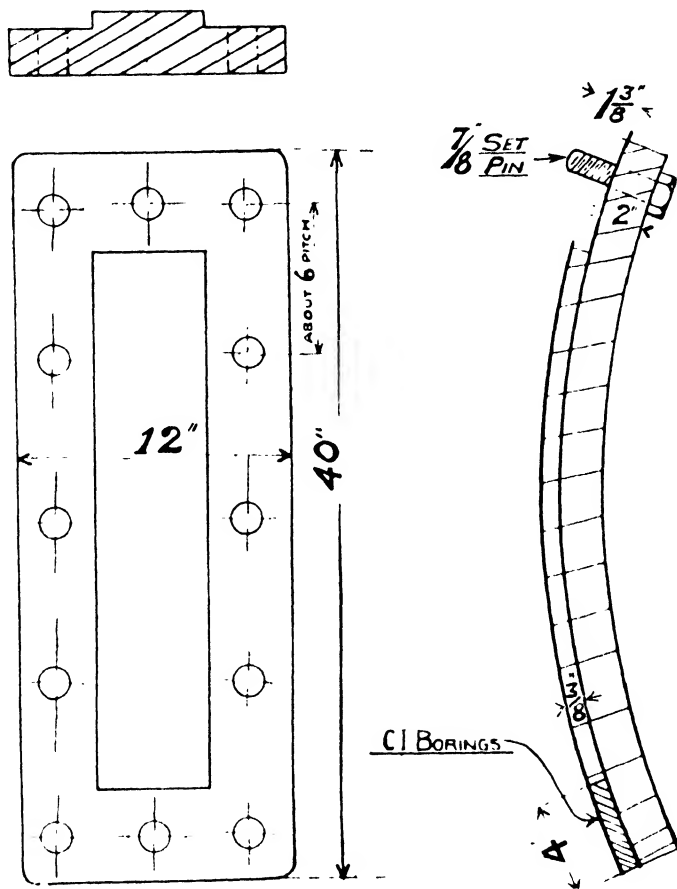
Detail of Patch for Inside Bottom of Retort.
